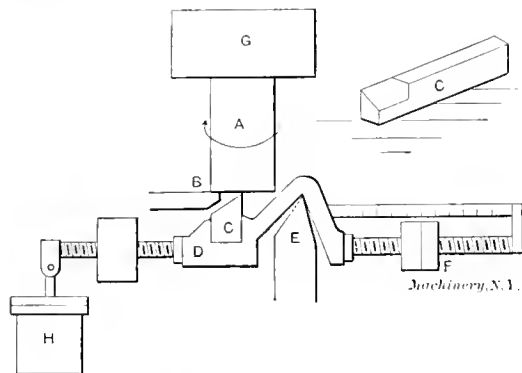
Diagrammatical View of Action of Tool Steel Testing Machine
